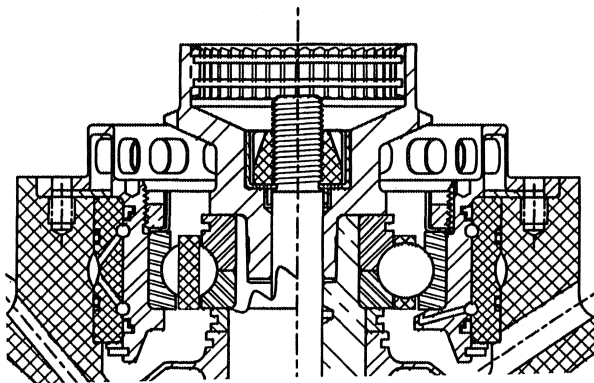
Squirrel Cage with a Squeeze Film Supporting a Ball Bearing.
